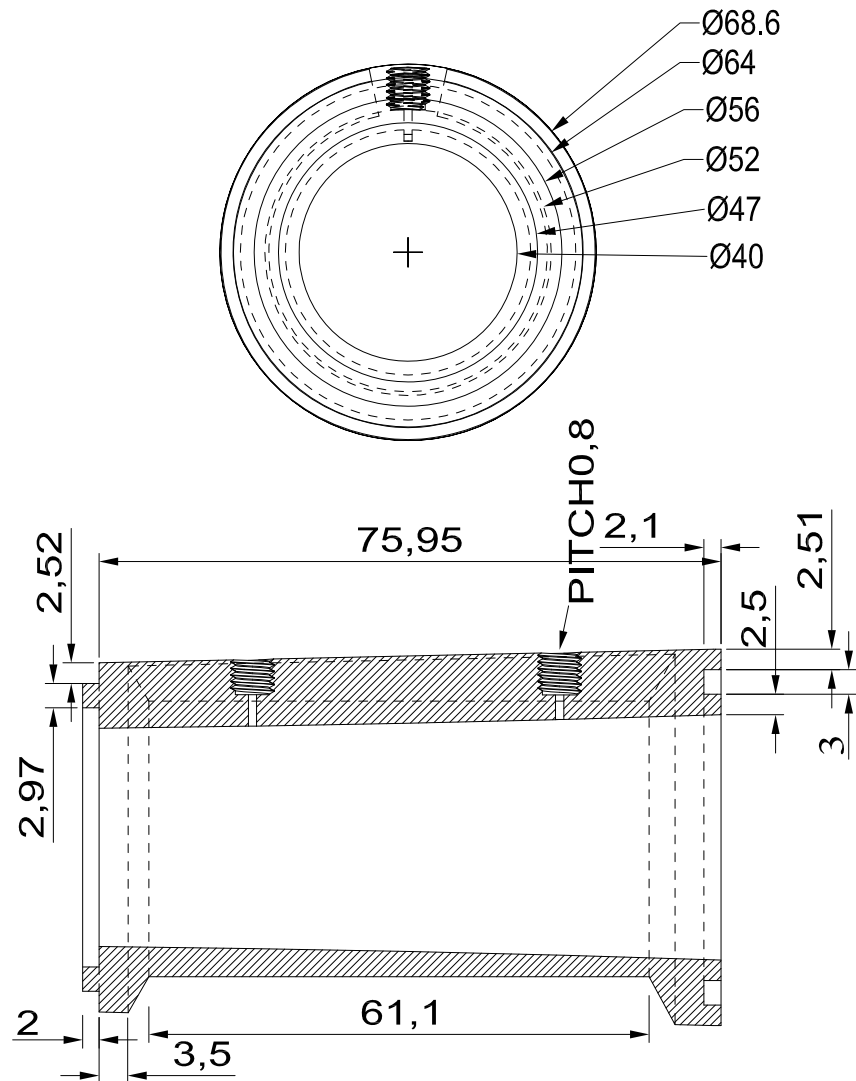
Profile of the part 4 of CRMC ejector with main dimensions, all dimensions in mm.
